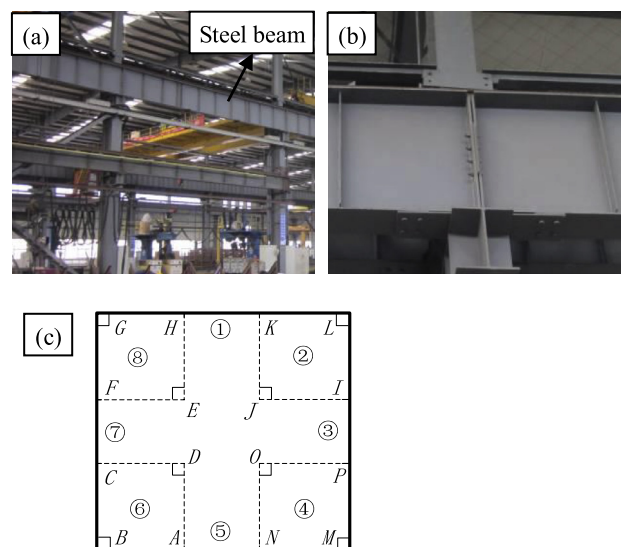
Some rectangular fillet welds in the steel structure workshop and the mathematical model of the rectangular fillet weld. (a) the steel beam consists of many rectangular fillet welds; (b) the real figure of two rectangular fillet welds; (c) the mathematical model of the rectangular fillet weld.
